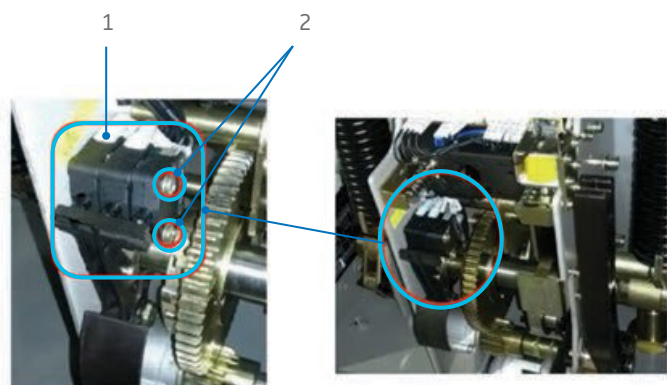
Removal and Replacement of Spring Charge Indication Switch
